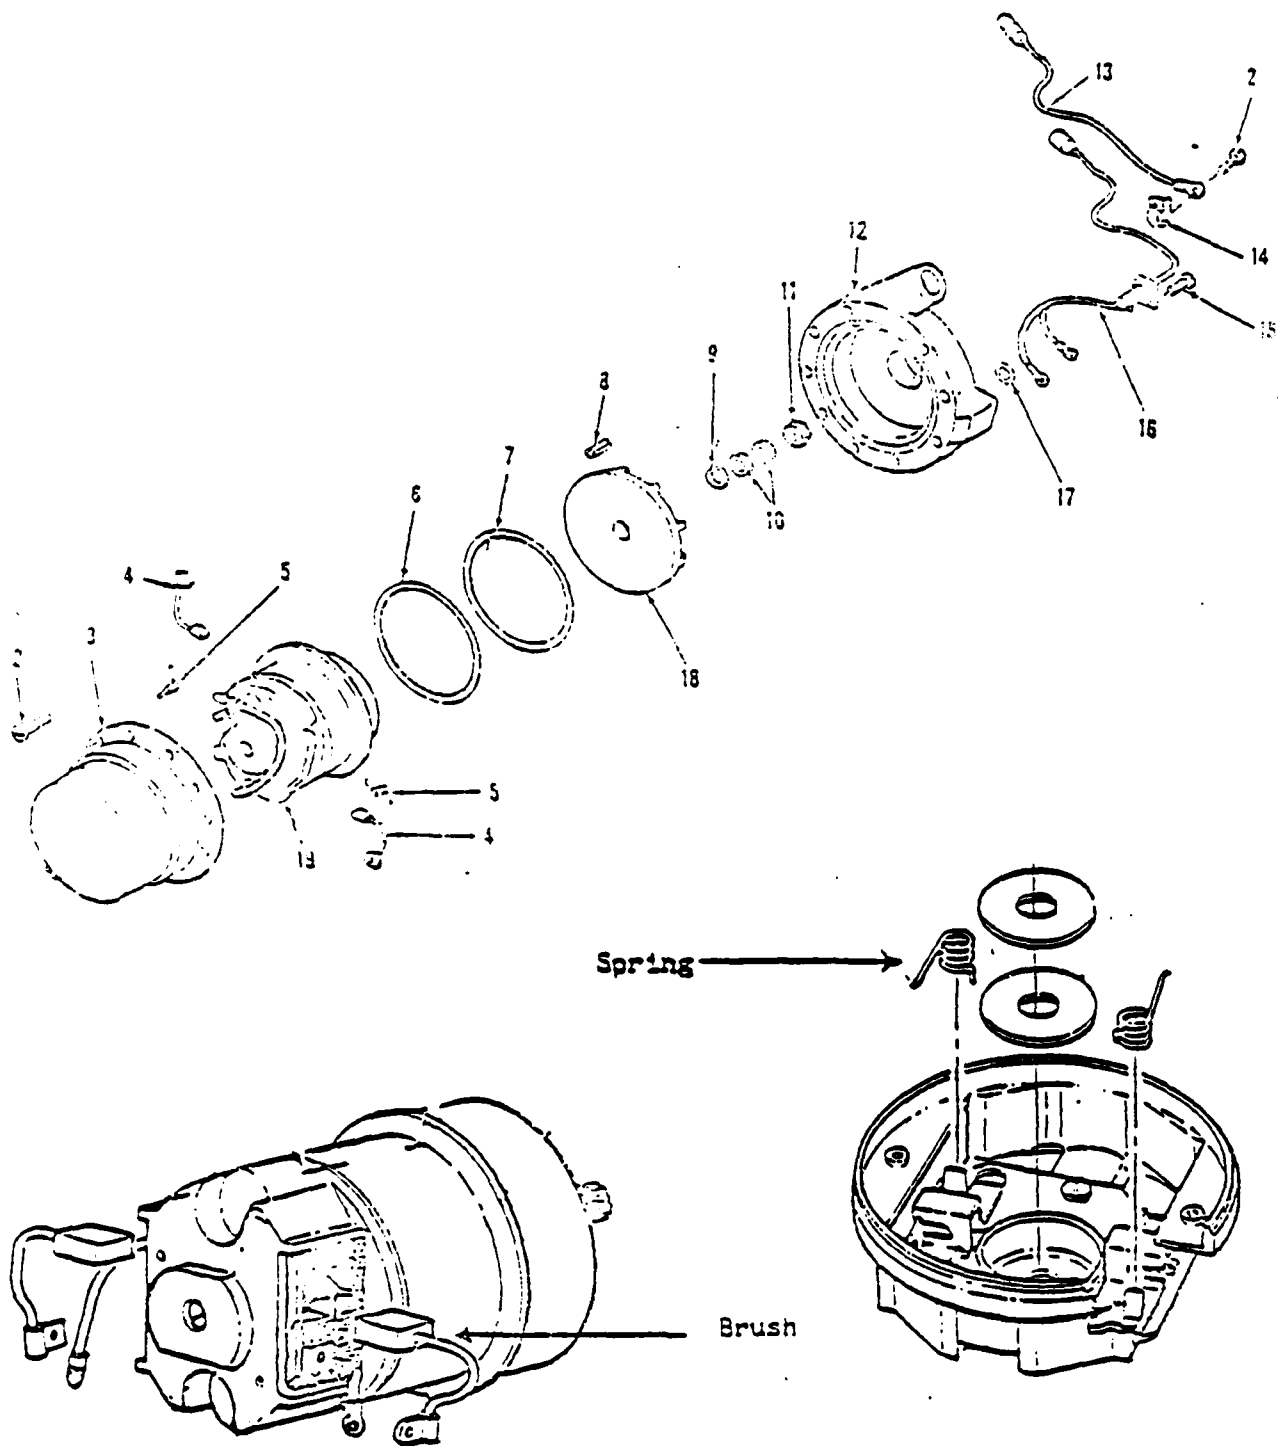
Air Cleaner Blower Motor Assembly Used on Several Classes of Tracked Vehicles¹
